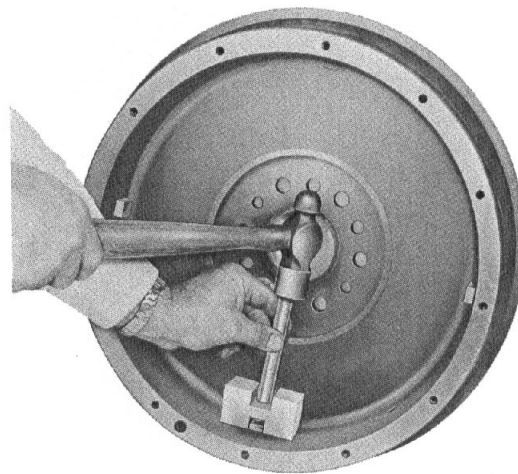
Driving Pin Alignment Gauge T-10670A.
